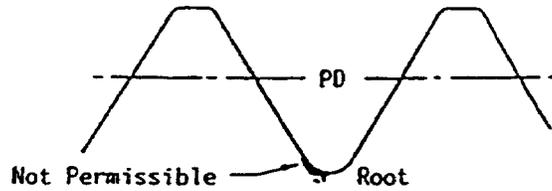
ROOT DEFECTS, ROLLED THREAD
